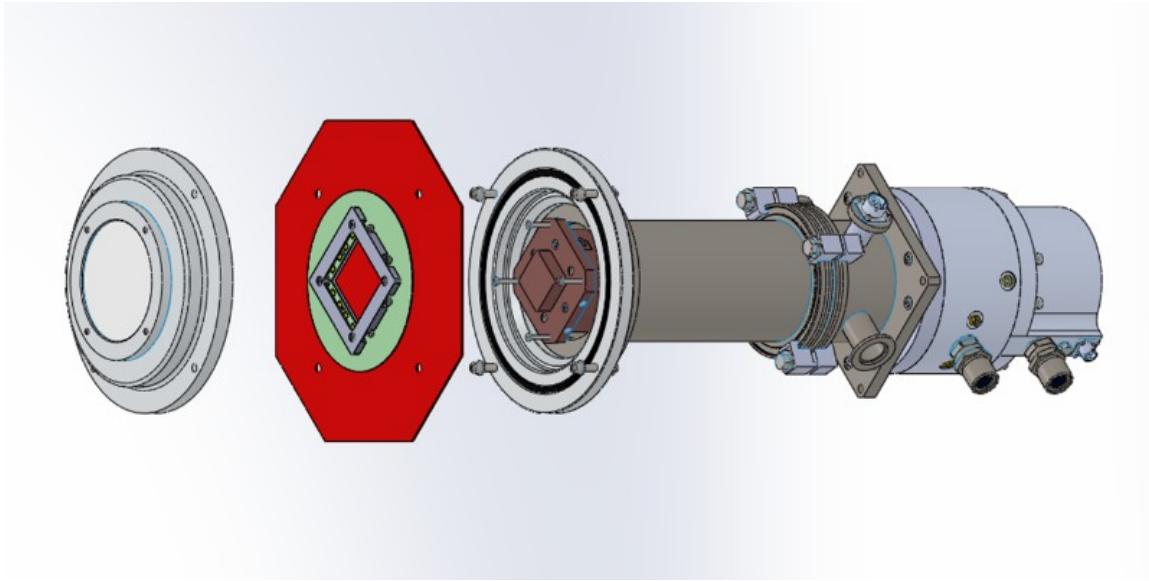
Solidwork’s schematic diagram showing the exploded parts view of the new custom ARS package. This image shows the mounting of the carrier board(Red Board)in the dewar[10].
